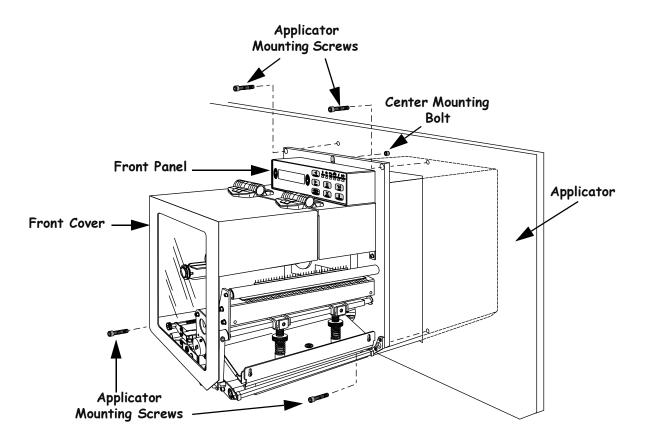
• Front View of 170*PAX*4 Print Engine in Applicator (Right-Hand Model Shown)
